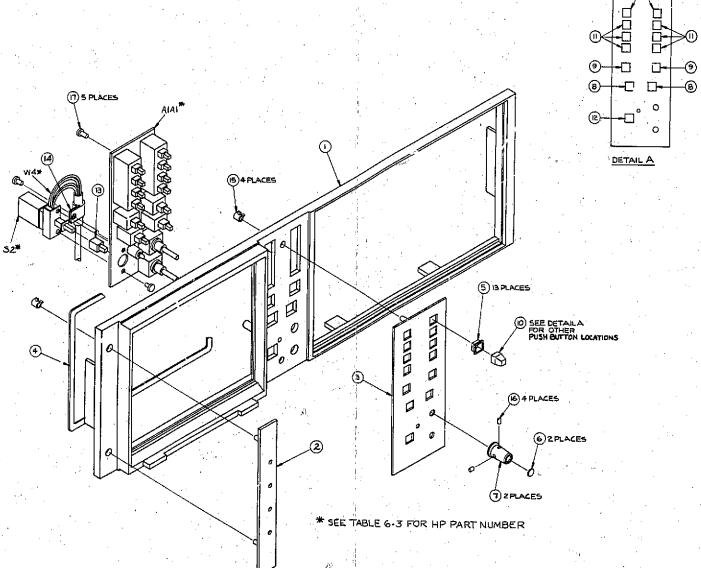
Front Panel, Parts Locations 6-25/6-26
